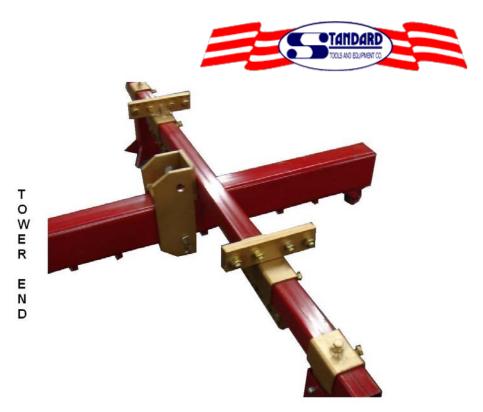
CENTERING OF PUSHER ASSEMBLY
